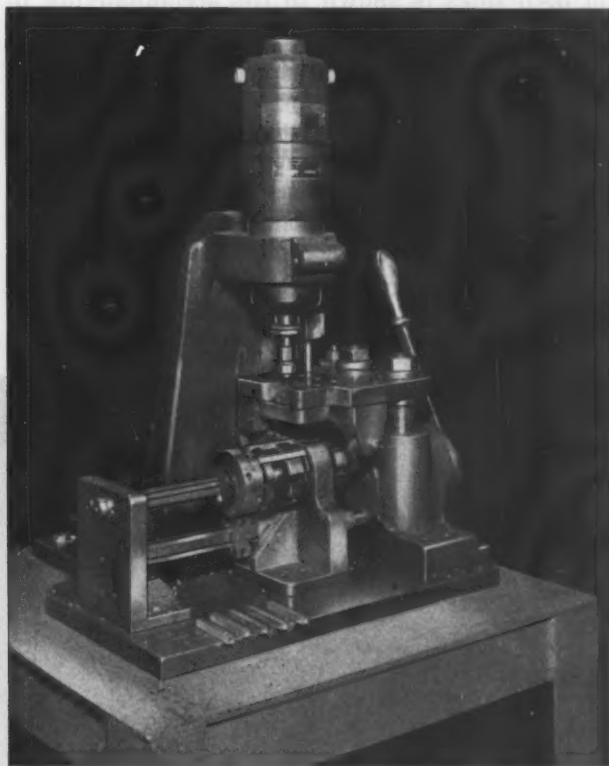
Drum Type Fixture Shown in Fig. 1, in the Open Position with Work Located in Drum
